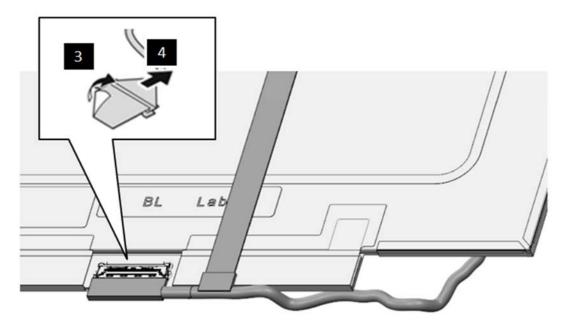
Disconnecting the Cable from Panel Assembly
